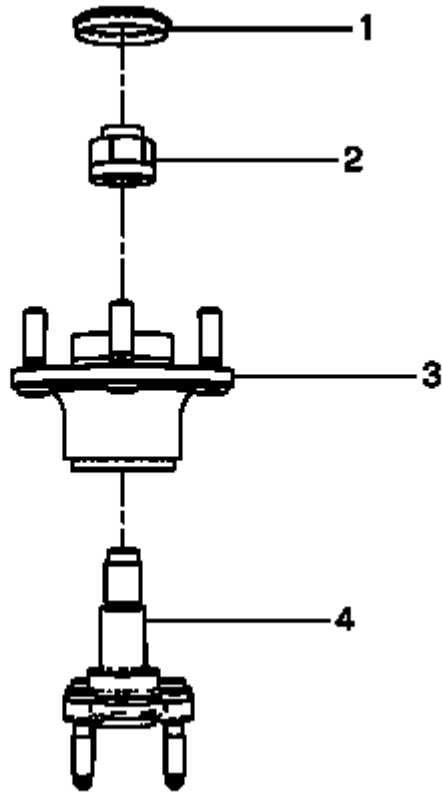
Wheel Bearing Cap And Wheel Hub/Bearing Assembly
